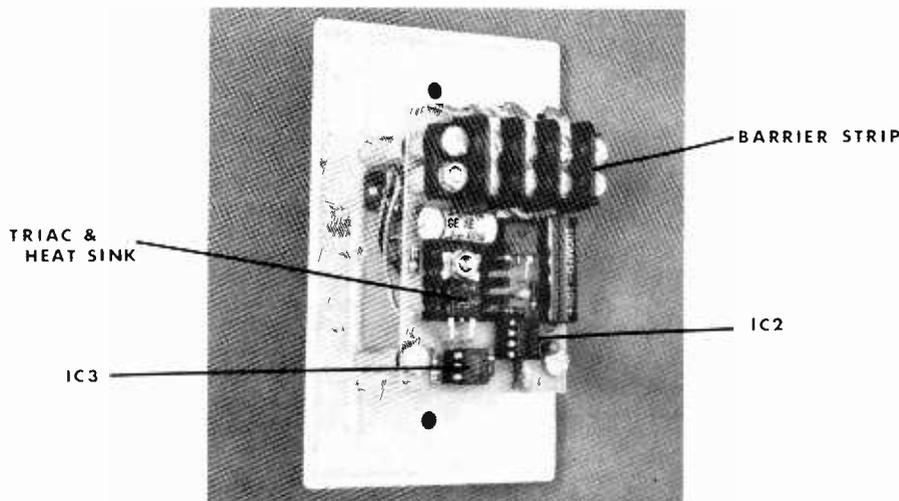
Photo of the back of the Smart Switch shows how pc board is mounted on a standard plastic cover plate.
